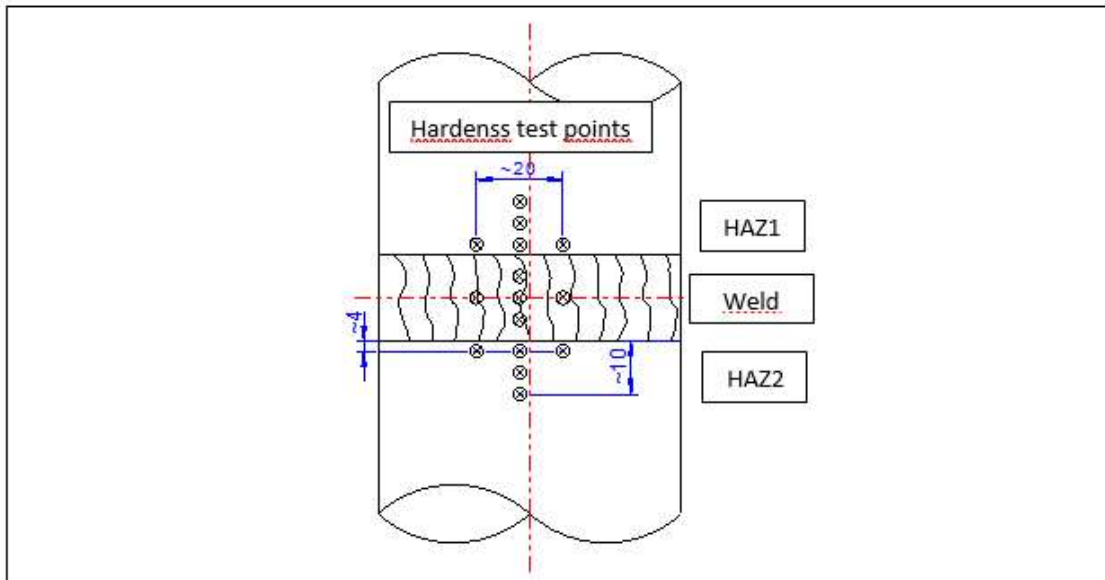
Scheme of hardness measurement in the area of the welded joint (circumferential weld).
